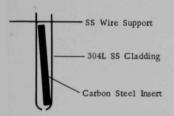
Typical Assembly of Type 304L Stainless Steel Cladding and Carbon Steel Insert
